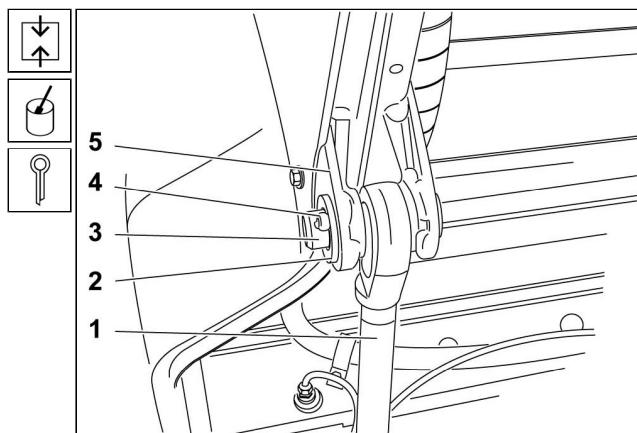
Location of hydraulic cylinder on cab - installation
